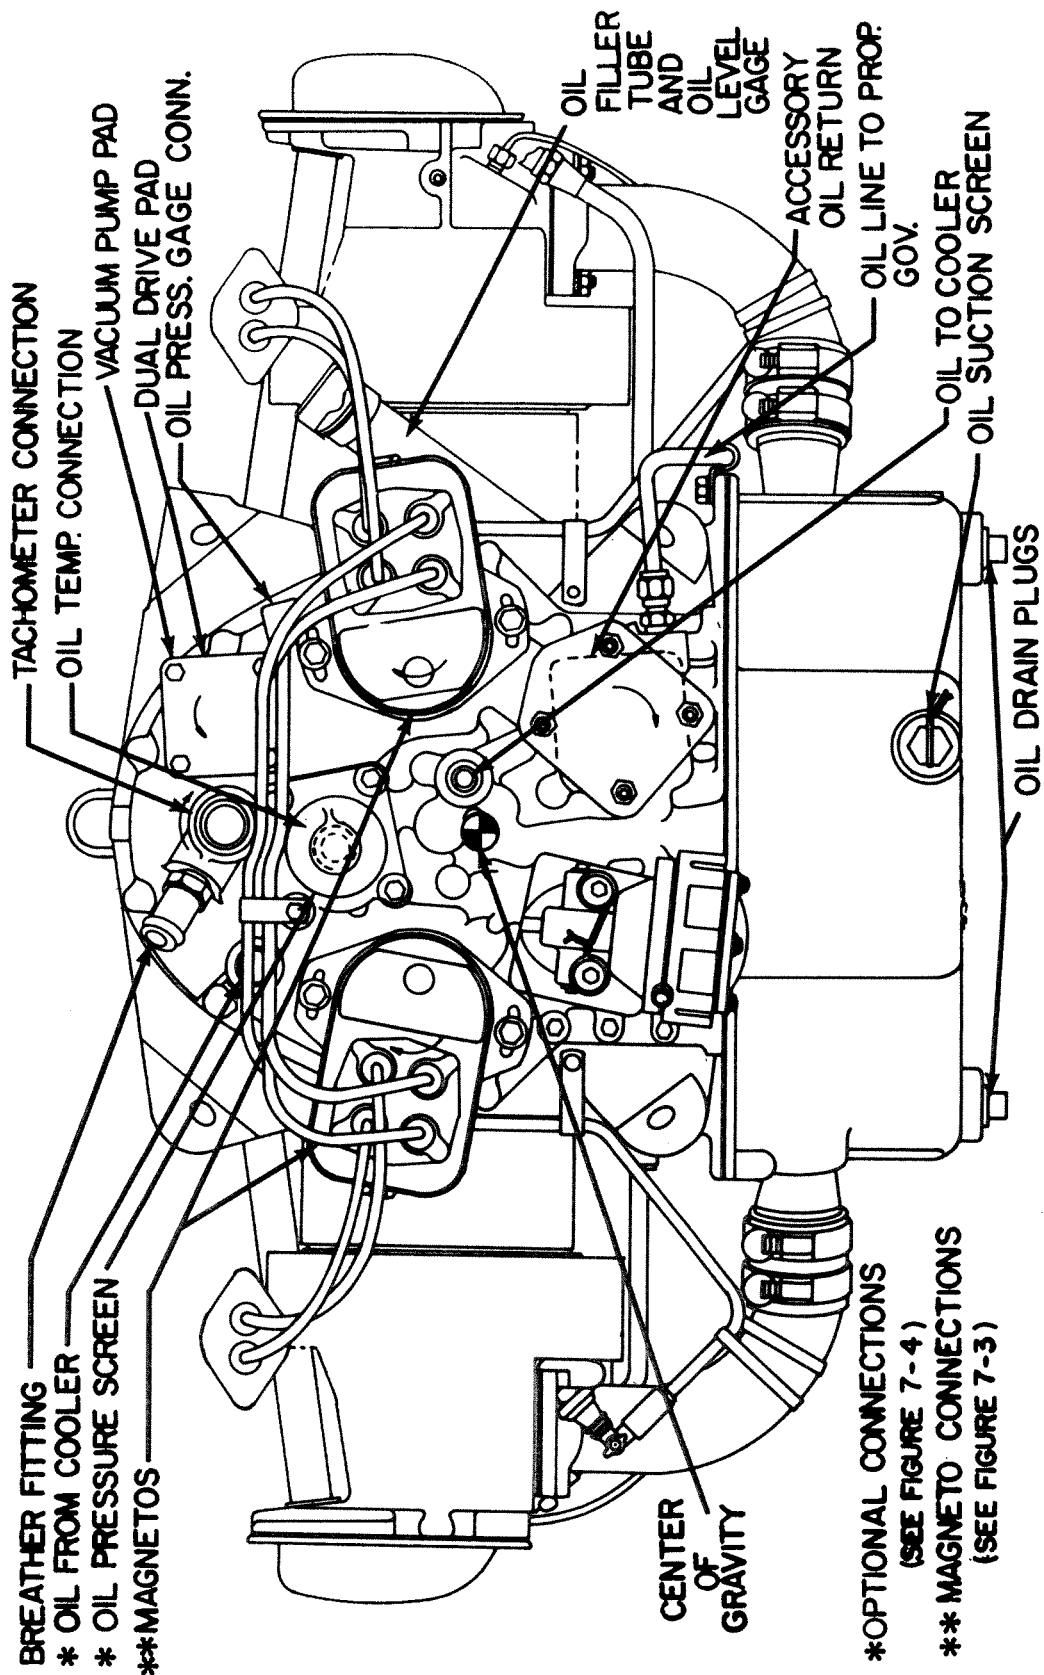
Installation Drawing Rear View - Typical O-320-D, -E Series
